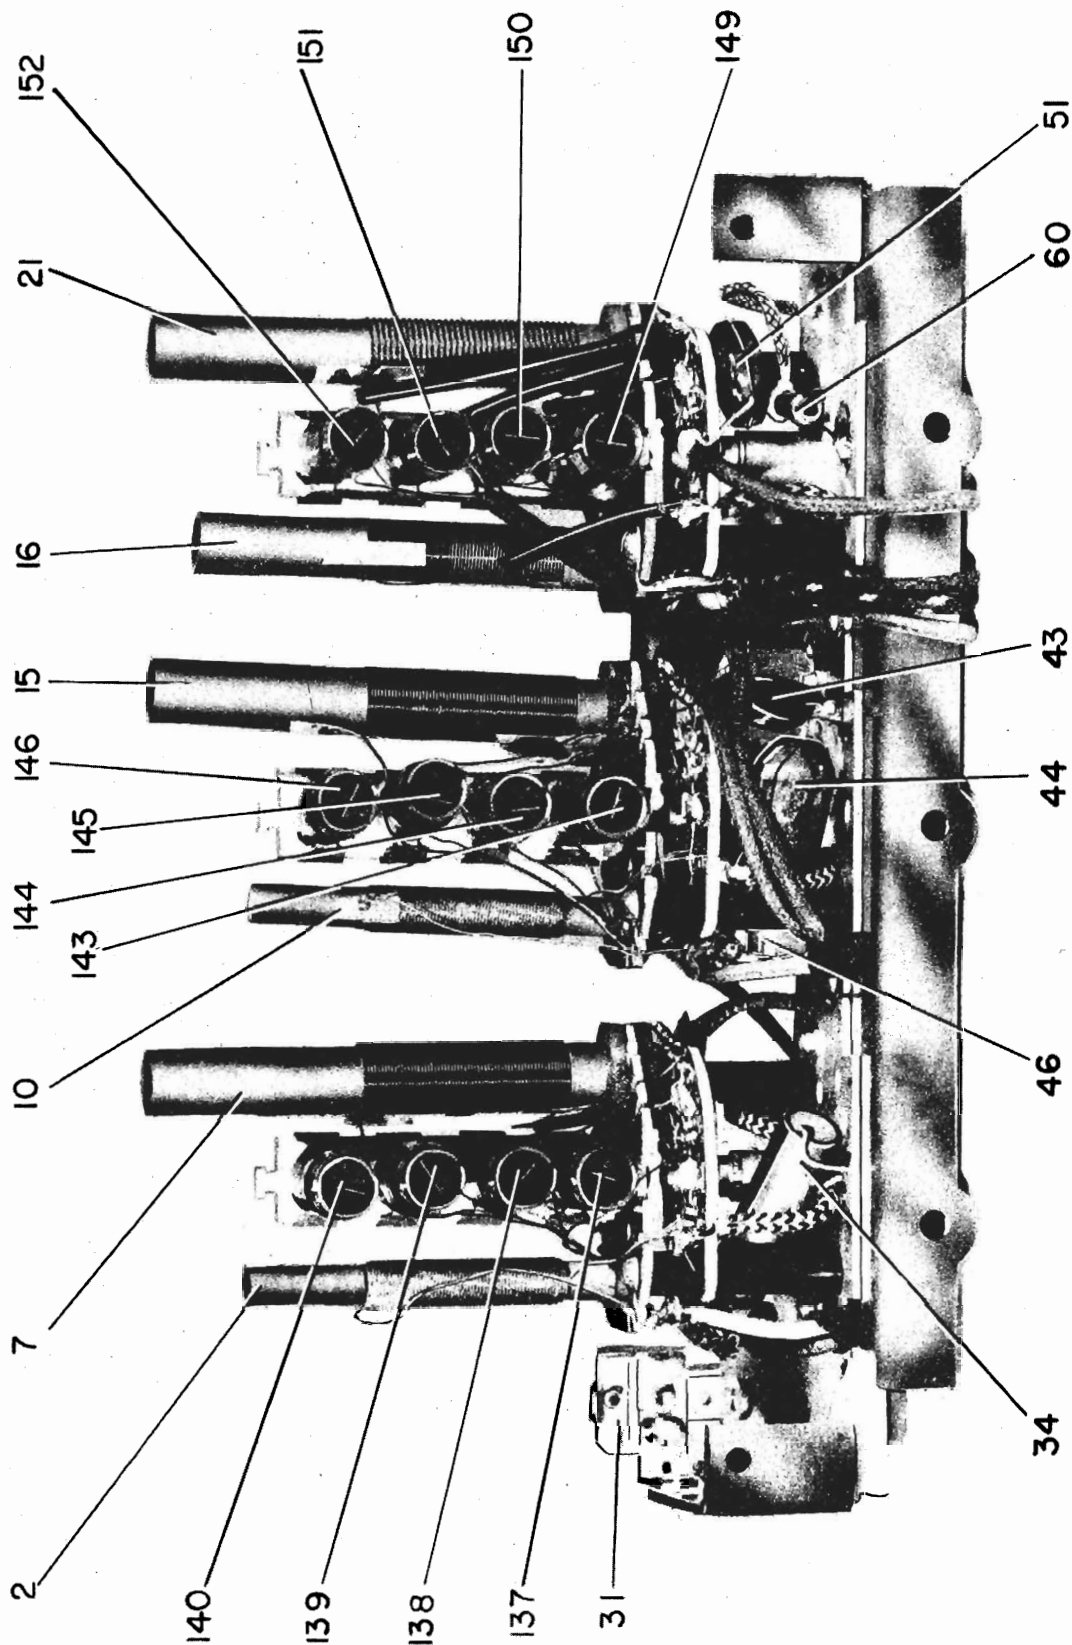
COIL ASSEMBLY (TOP VIEW)—RADIO 985794
